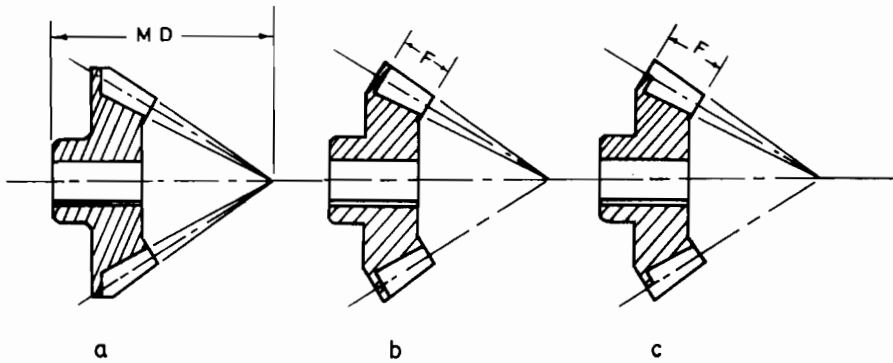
Straight teeth bevel gears (a) upright back support (b) back support perpendicular to the line of the pitch cone (c) short back support.
